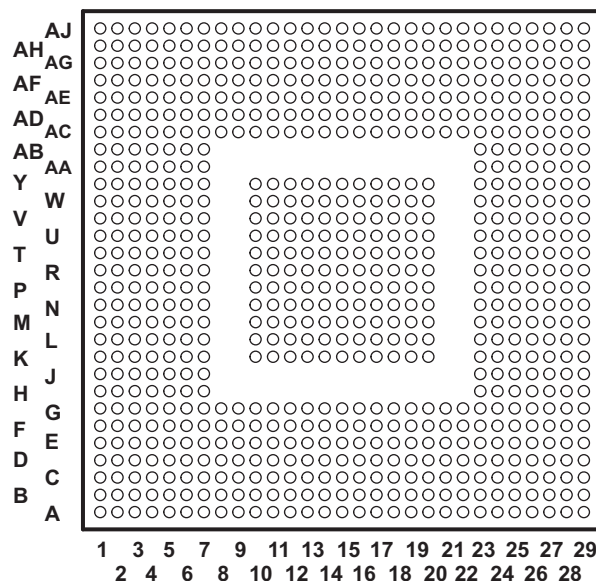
CTZ/ITZ 737-Pin Ball Grid Array (BGA) Package (Bottom View)
